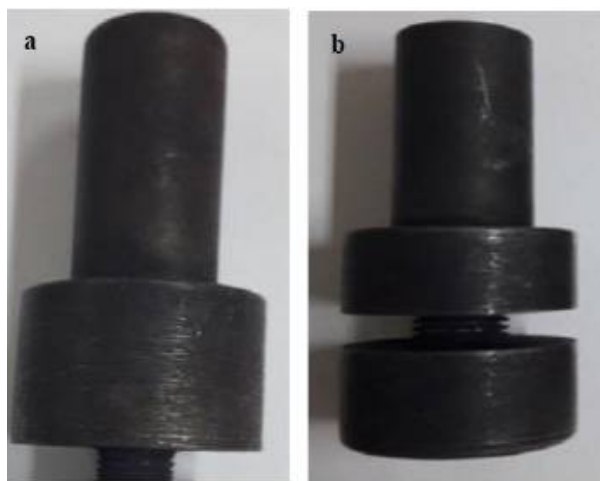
The manufactured tools, a) Typical tool b) Bobbin tool
